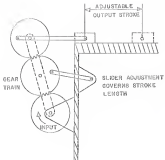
Geared Mechanism Telescoped Crank with Adjustable Amplifier
